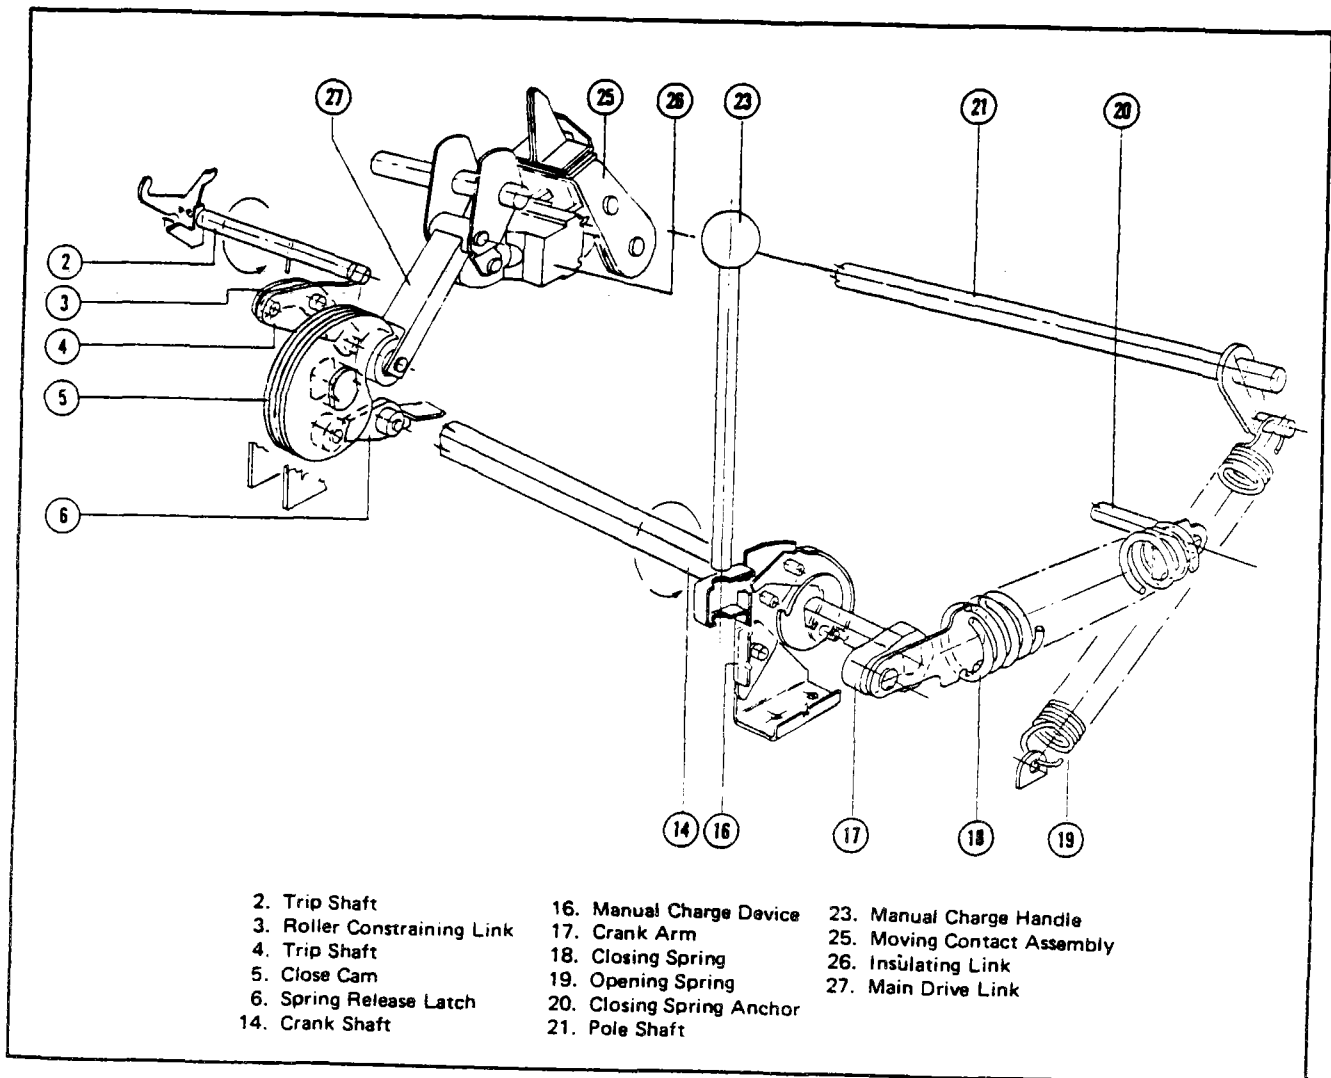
Principal Parts in a Manually Charged Spring Operated Mechanism.
